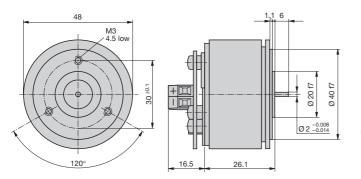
KINAX 2W2 with standard drive shaft at front only, Ø 2 mm, length 6 mm, screw terminal version.
